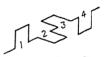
Conventional crank-arm arrangement in the eight-cylinder V-engine.
